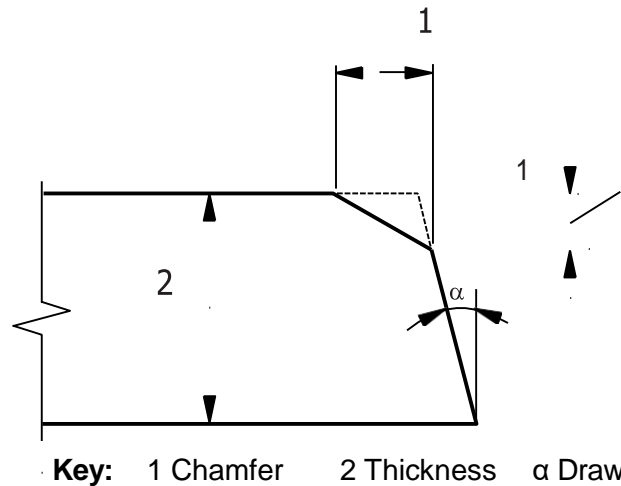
EXAMPLE OF CHAMFER AND DRAW
